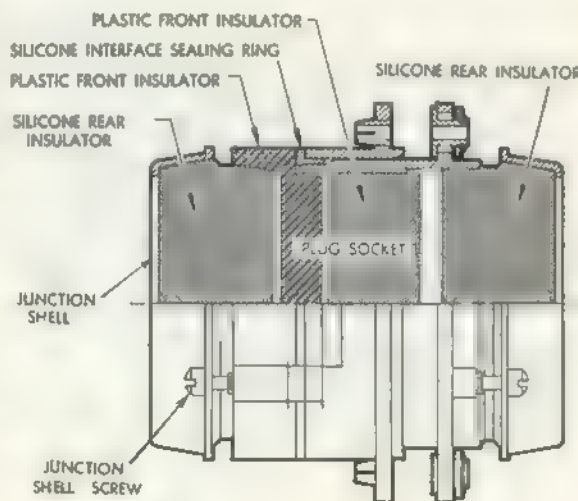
Sealing arrangements of a Cannon plug and socket connector. Contact cavities in the insulators are not shown.
